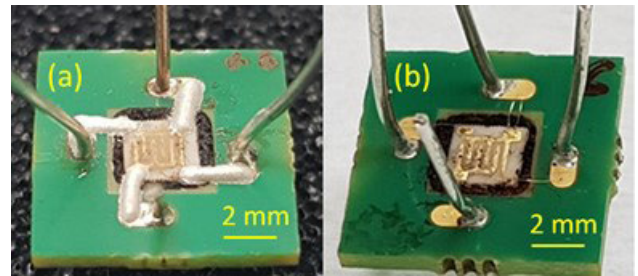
Photographs of the front side of the sensor: CA version (a) and WB sensor (b).
